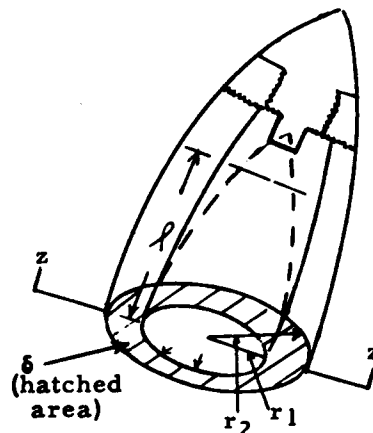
Stress in projectile wall due to setback acting on projectile.
